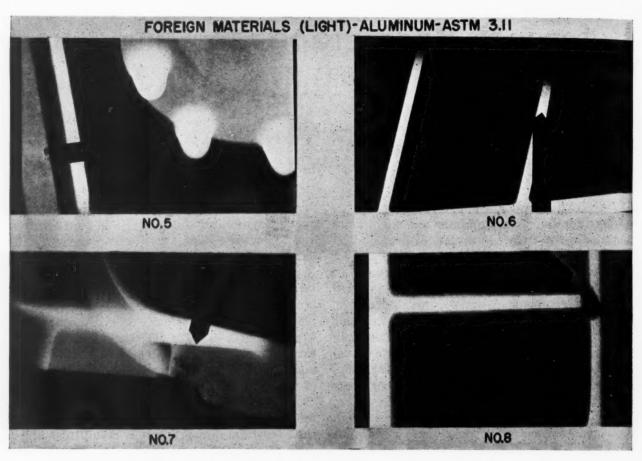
Reproduction of one page from the Bureau of Aeronautics "Manual of Illustrations of Defects in Aluminum and Magnesium Castings"
